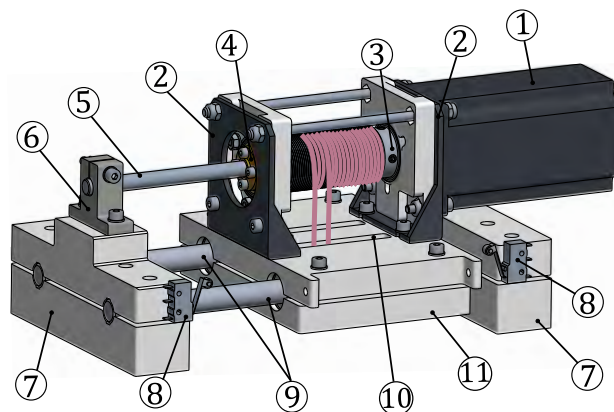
3D model of the winch: (1) servo-stepper motor, (2) brackets, (3) aluminum drum, (4) brass nut, (5) screw shaft, (6) support element, (7) base plates, (8) end-stop switches, (9) circular rods, (10) cable guidance slot, (11) carriage.
